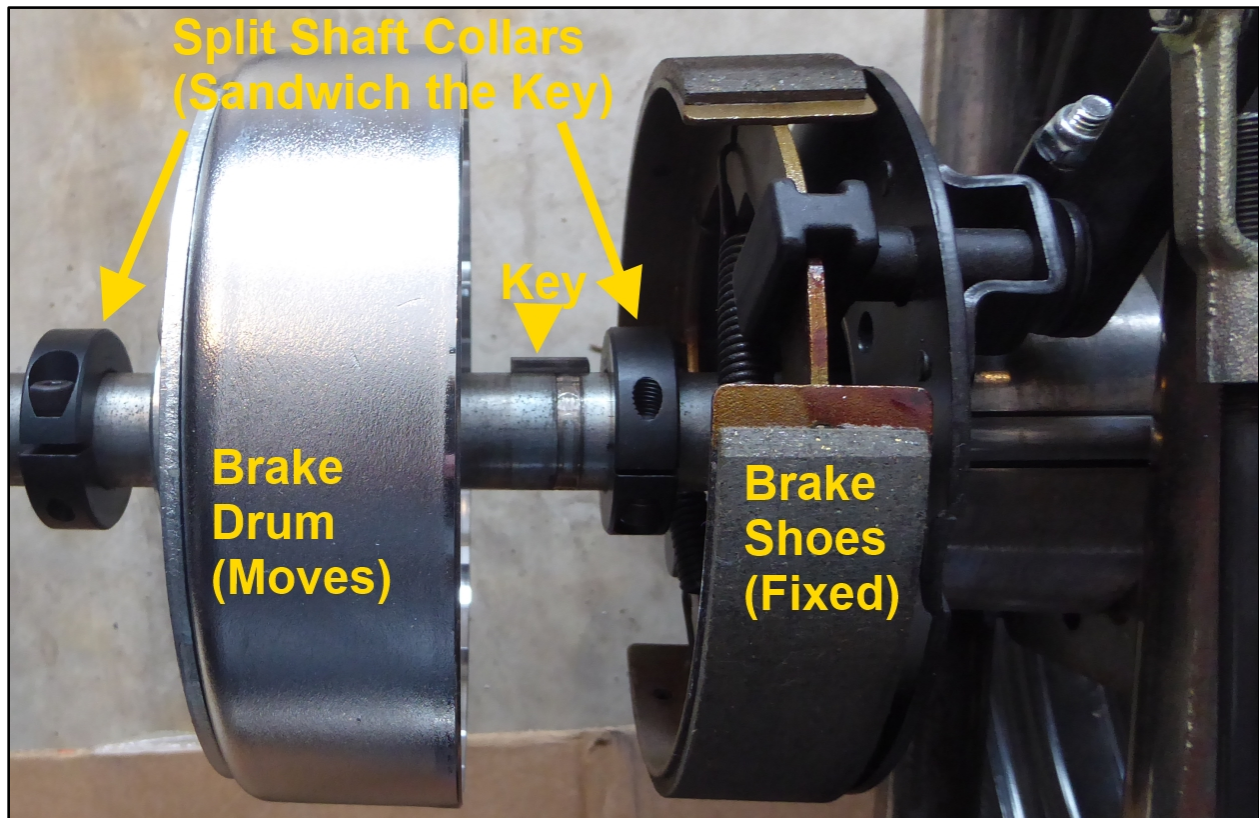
Detail of how brake drum is sandwiched to hold the key.
